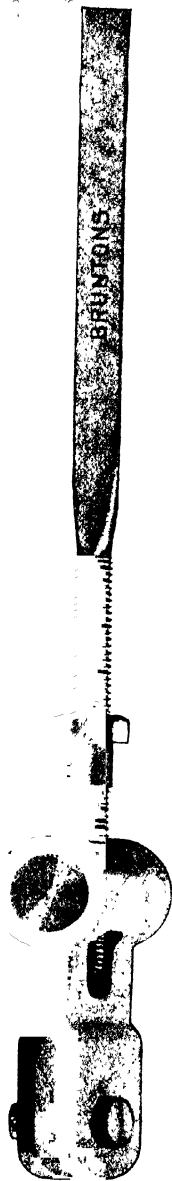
RAFWIRE TRUNNION JOINT FOR BRACING WIRES.
